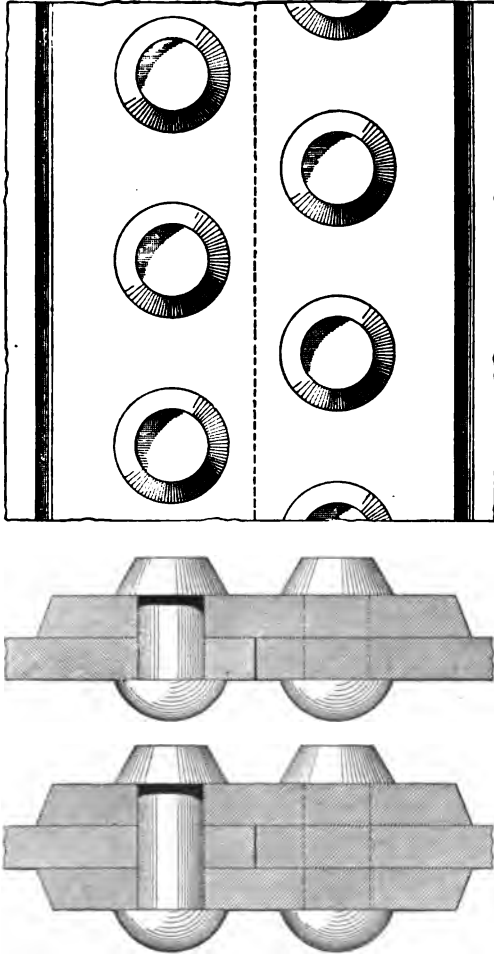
Single Riveted Butt Joint, with Single or Double Straps.
